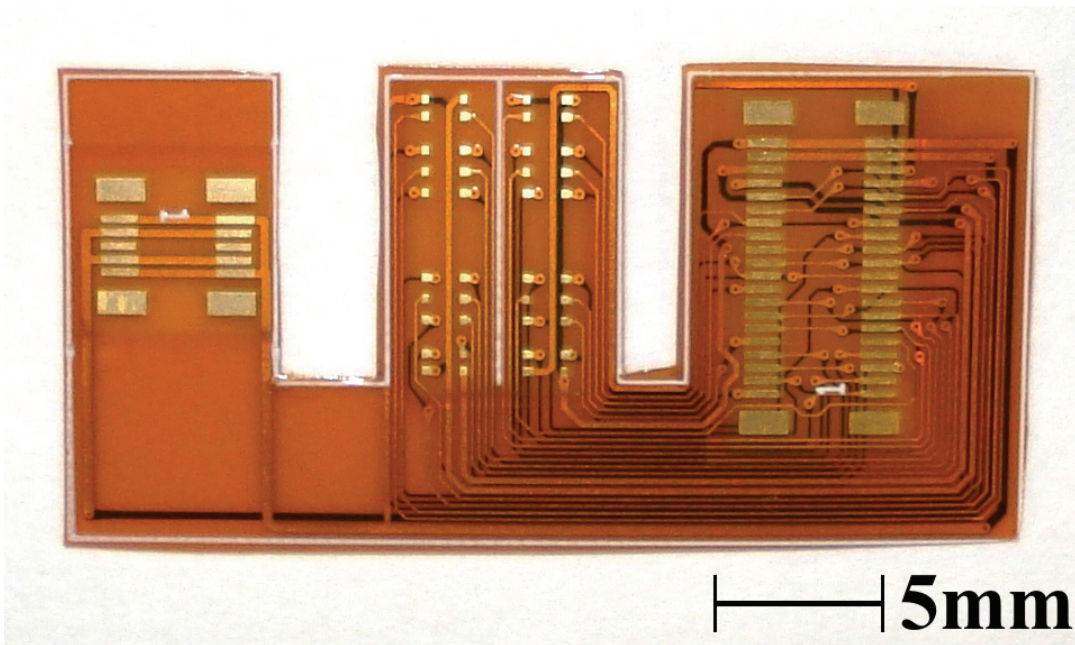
A photograph of the printed FPCB with reliefs removed to facilitate placement on the head of the pedicle screw.
